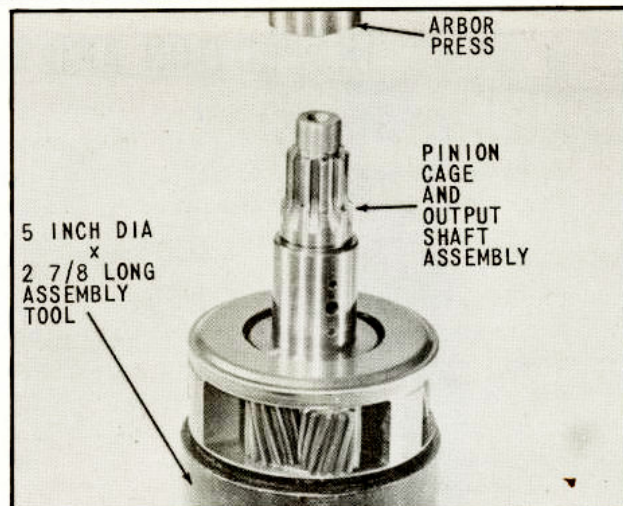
Pinion Cage and Output Shaft Assembly in Place on Arbor Press
